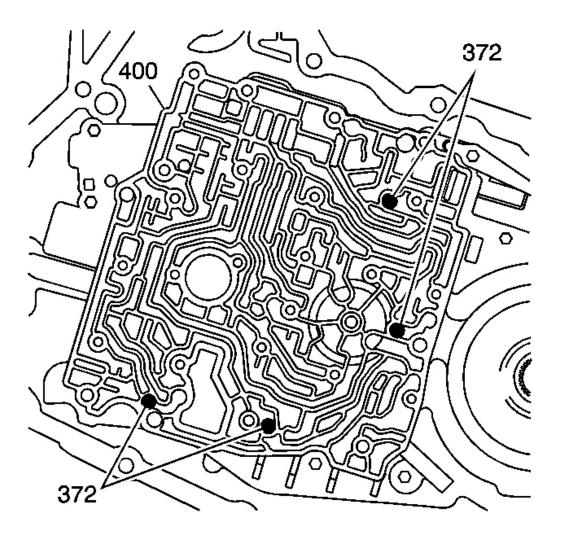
Locating Ball Check Valves In Case Cover Courtesv of GENERAL MOTORS CORP.
